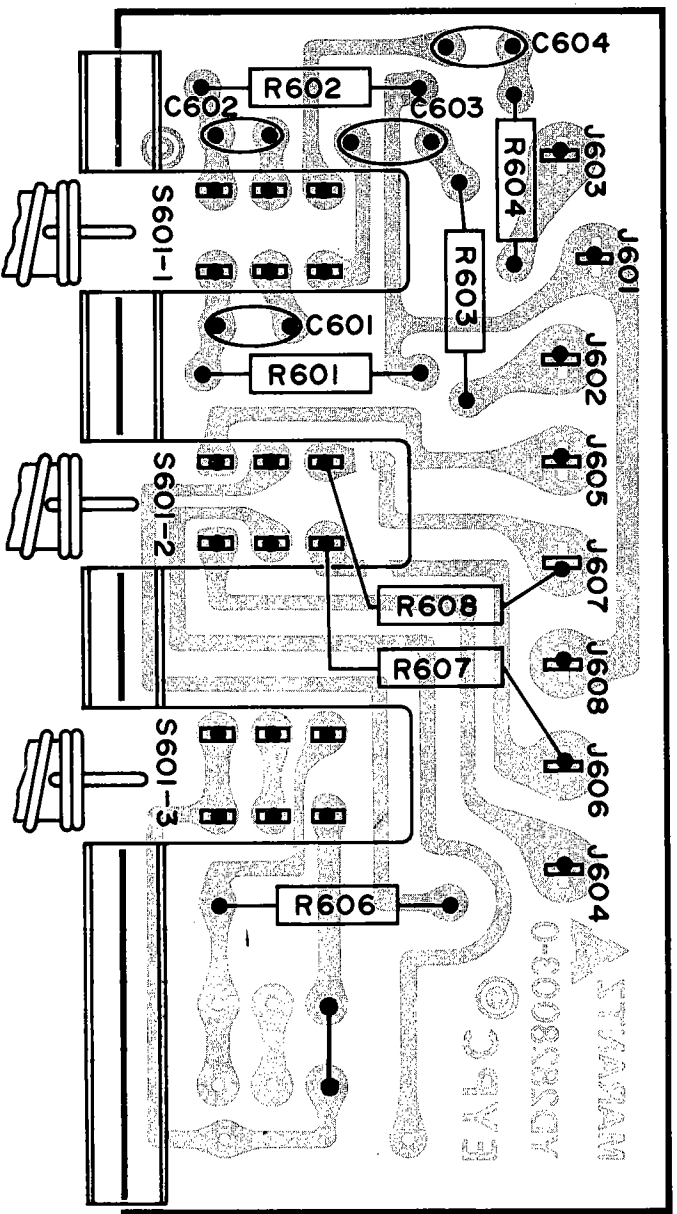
Loudness, Tape Moni. and Mono Switch Unit Assembly P600 Component Locations
